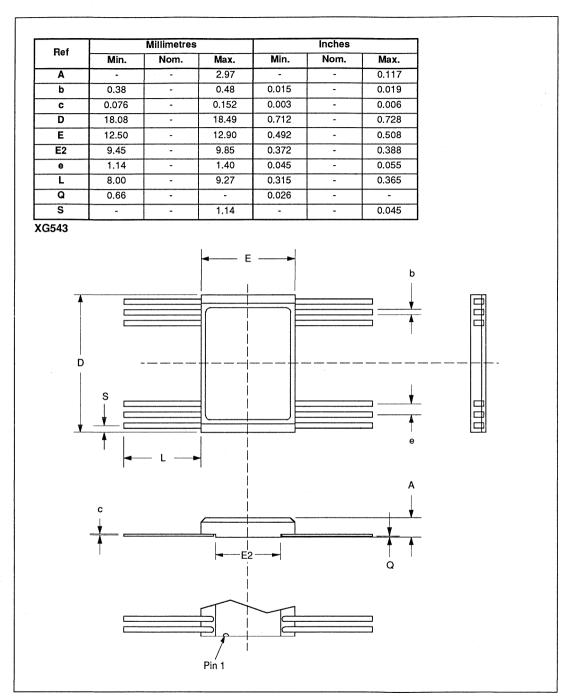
28-Lead Ceramic Flatpack (Solder Seal) - Package Style F
